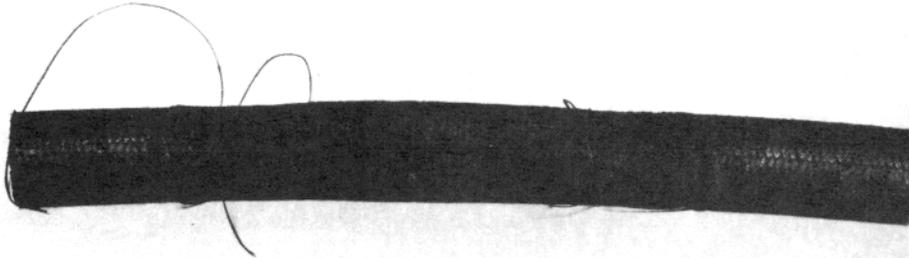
TYPICAL UNCOATED AEROQUIP SELF-SEALING FUEL LINE AFTER TEST IN DRY BAY FIXTURE
